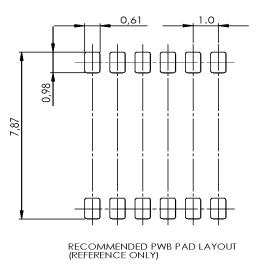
Recommended PWB pad layout for SCA3300-D01. All dimensions are in mm. The tolerances are according to ISO2768-f (see Table 9)
